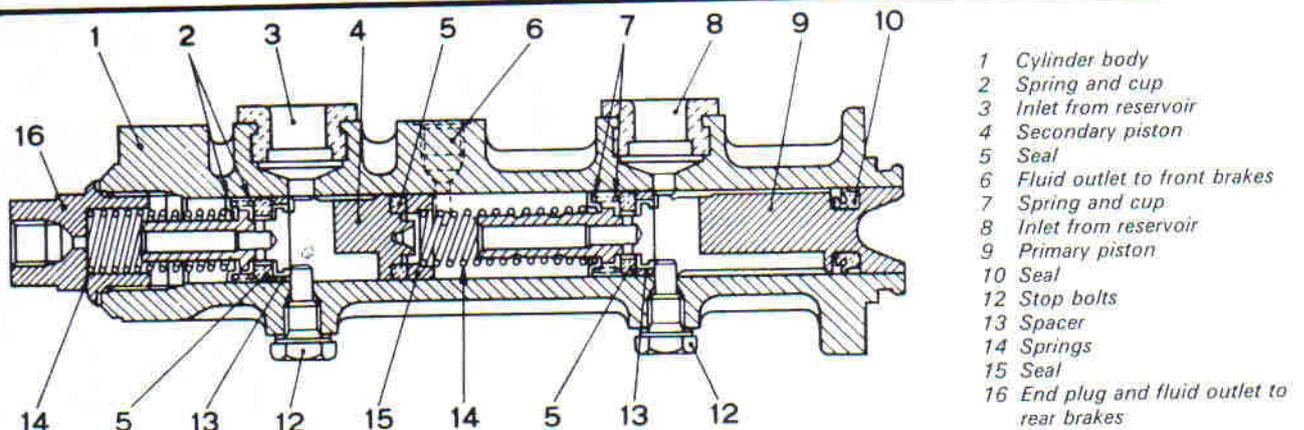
Sectional view of master cylinder (Sec 10)
